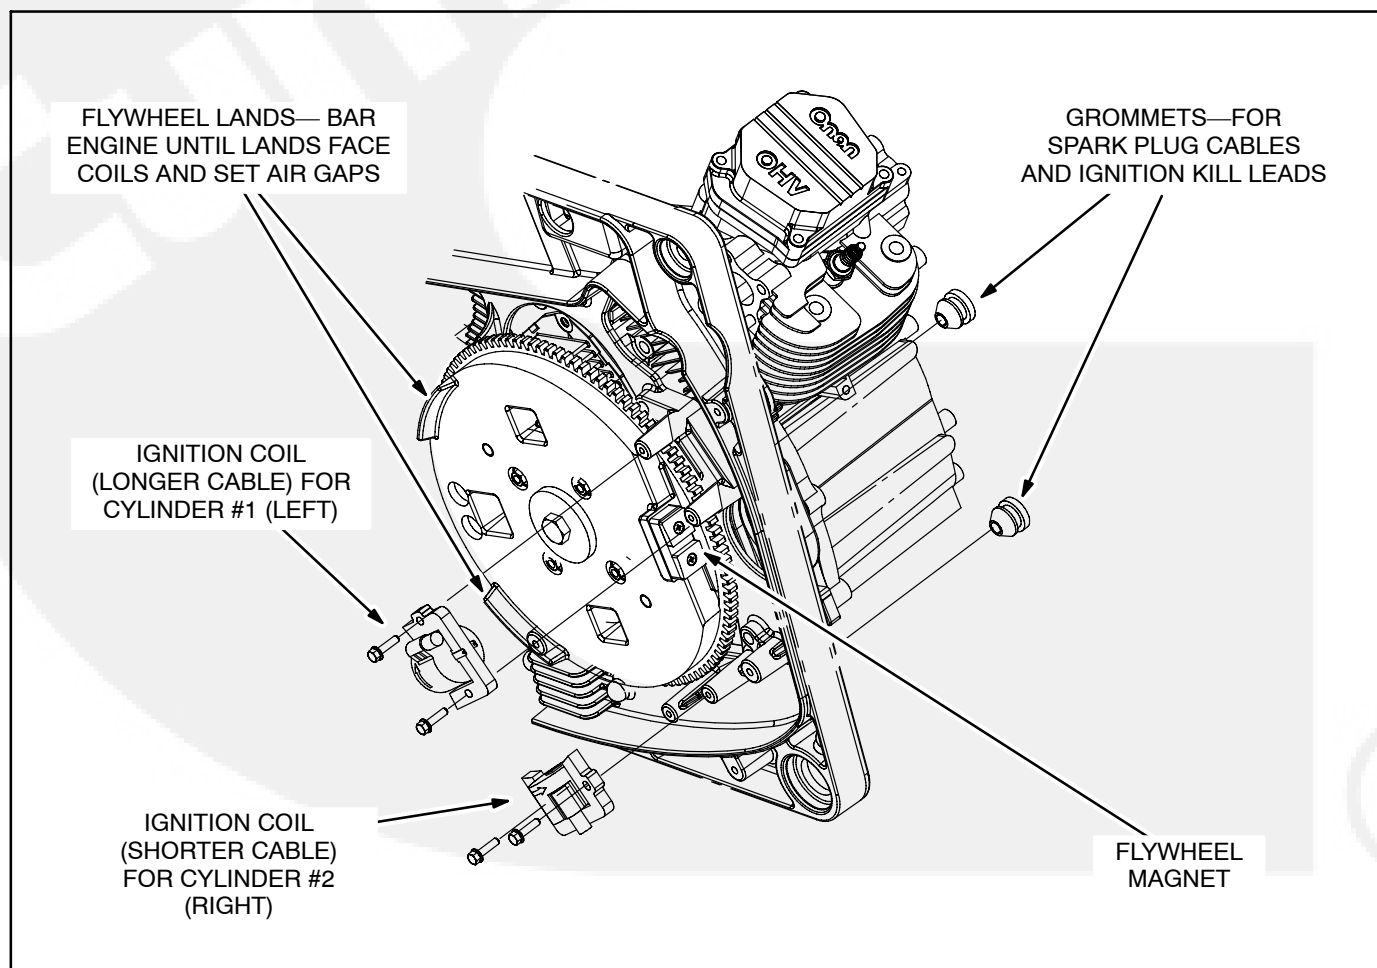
IGNITION COILS (MAGNETOS)
